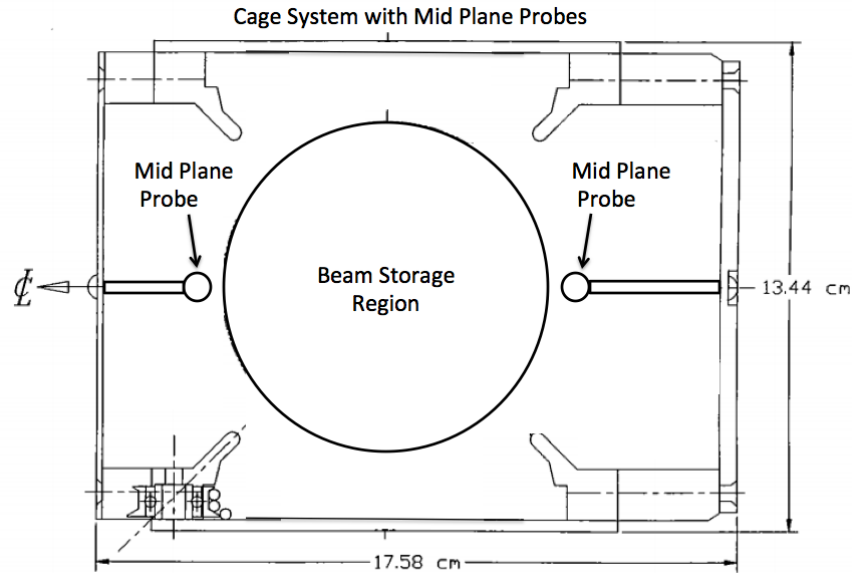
Concept for placement and attachment of mid plane probes within the cage systems that do not contain quadrupole and kicker plates. Signal coax cables attach to commercially available vacuum SMA electrical feed throughs.
